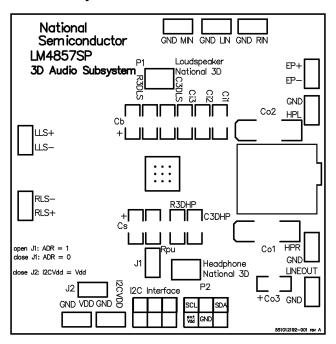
Recommended UQFN PCB Layout: Top Over Layer
